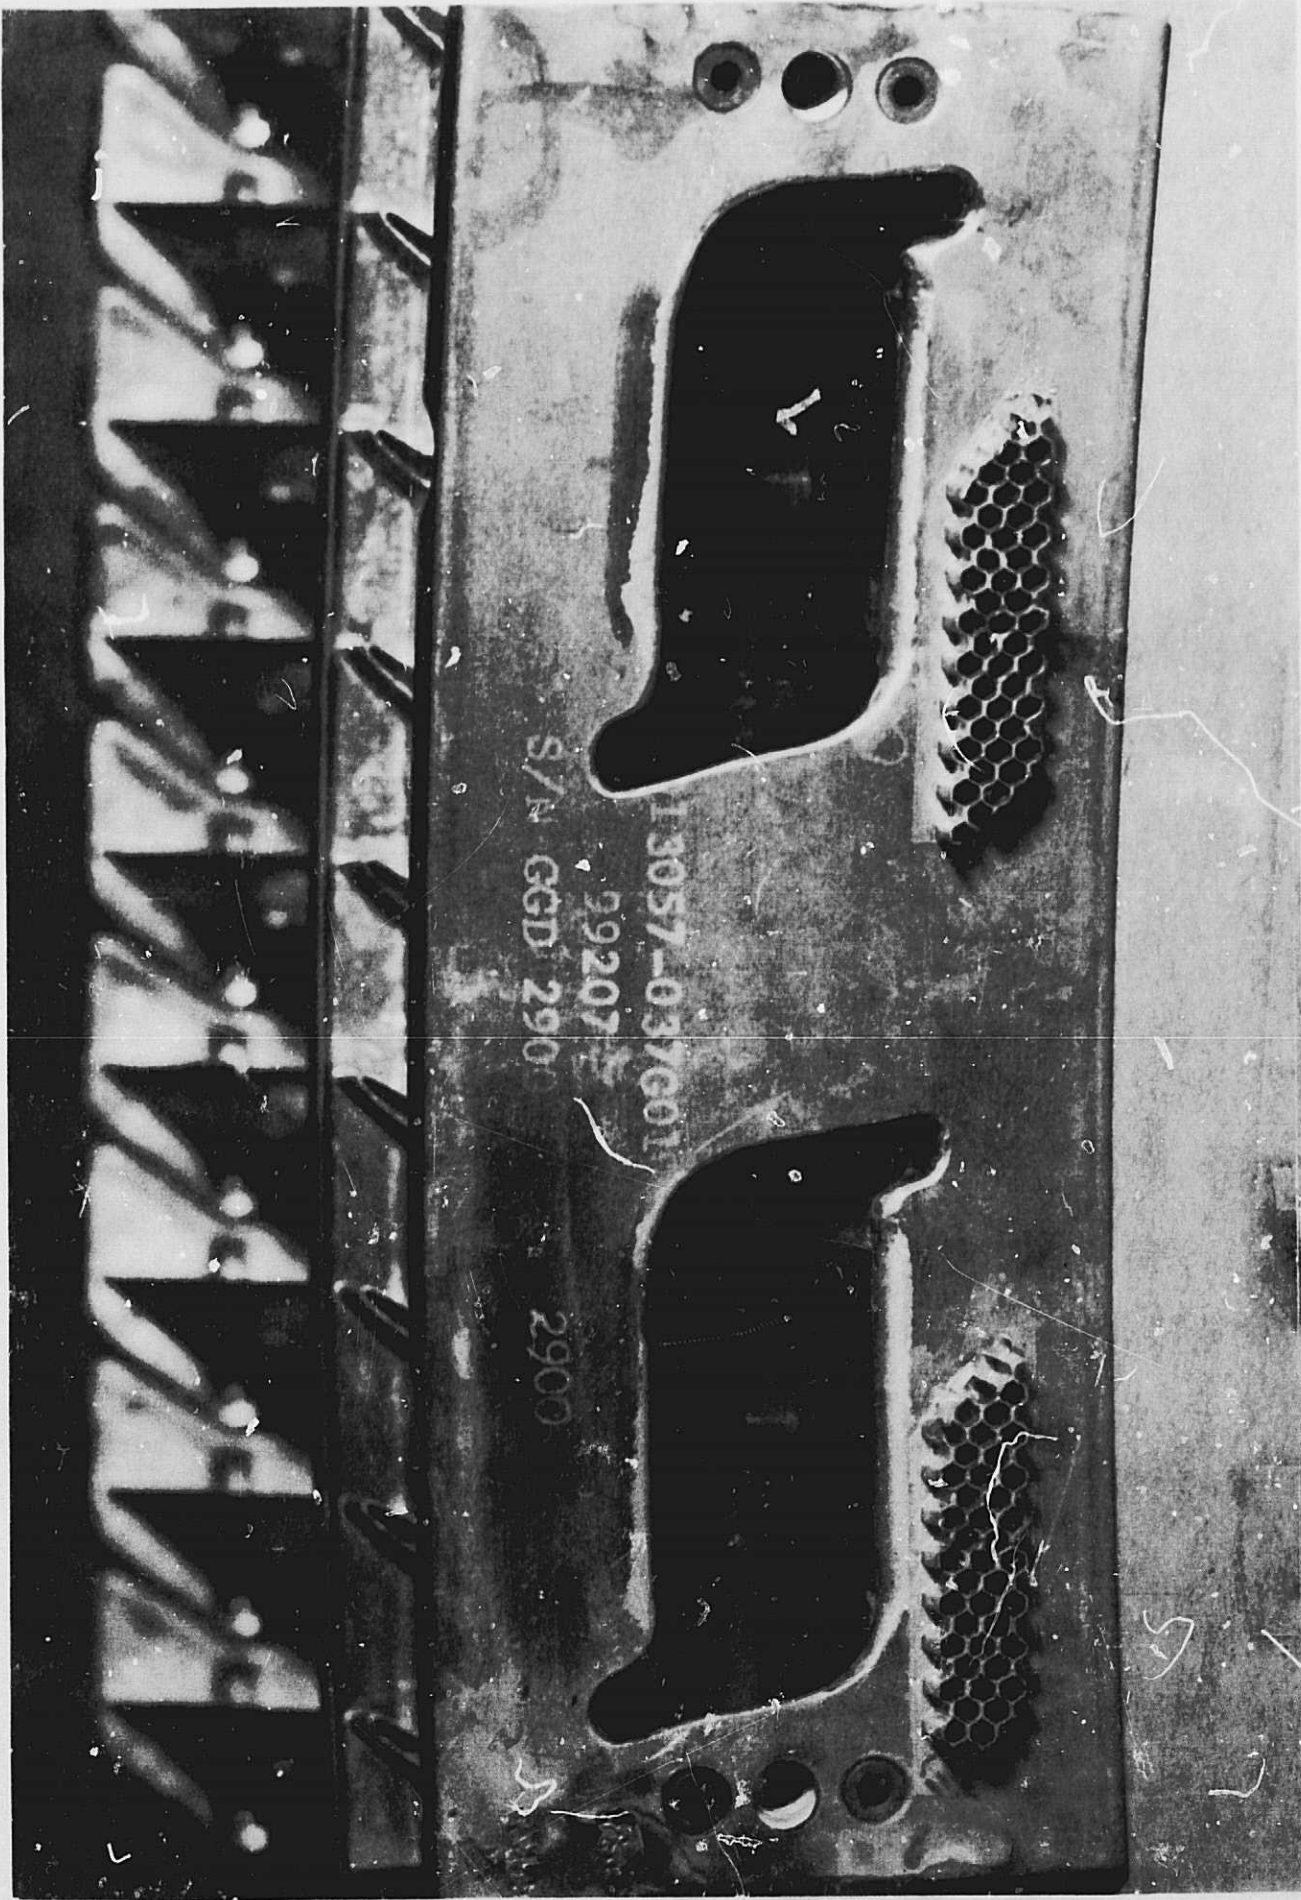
Turbine Carrier Modifications - Dams And Enlarged Cooling Holes
